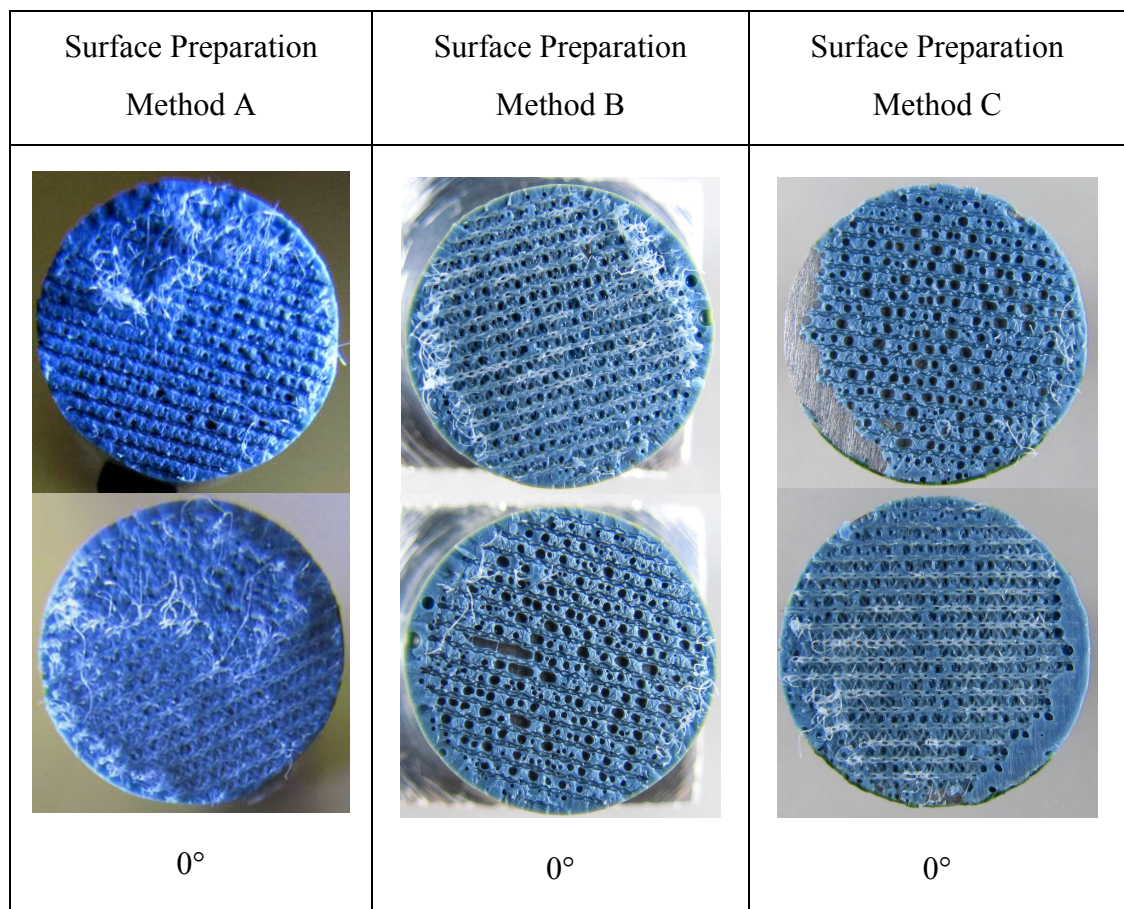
Typical fracture surfaces of the 0° scarf joints
